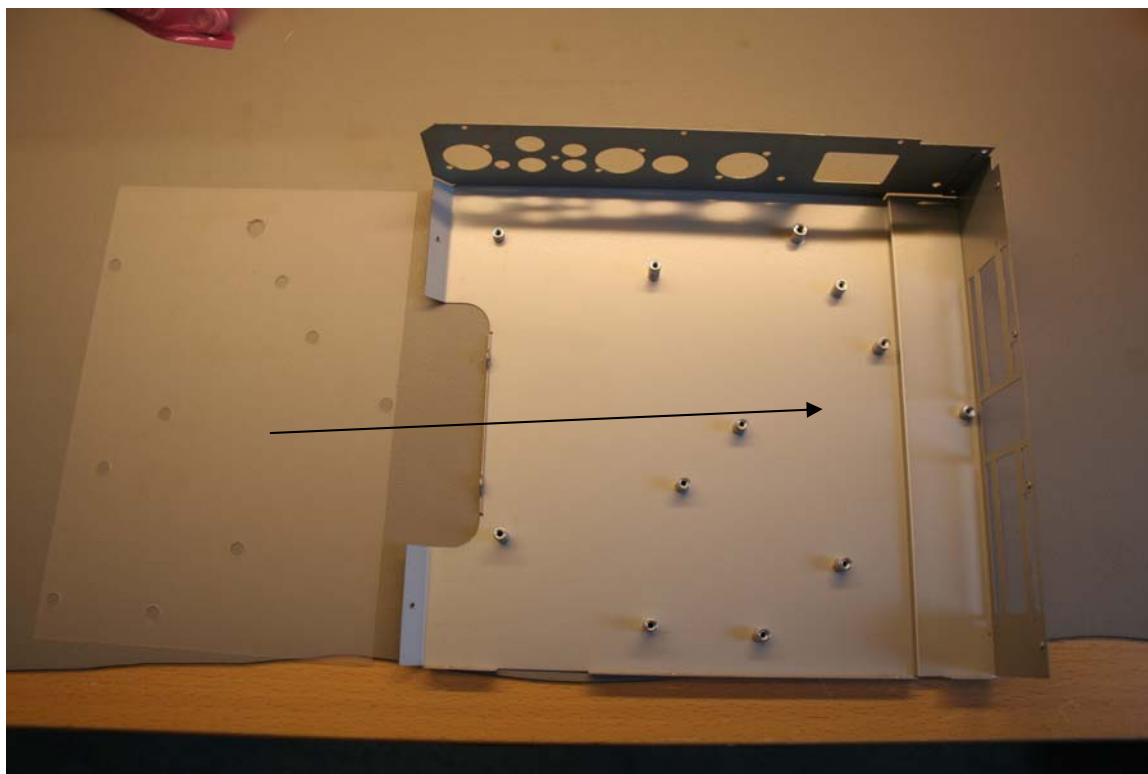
Use isolation plate DR09019 and Inner box Bottom DR09006-F, for this sub assembly.
